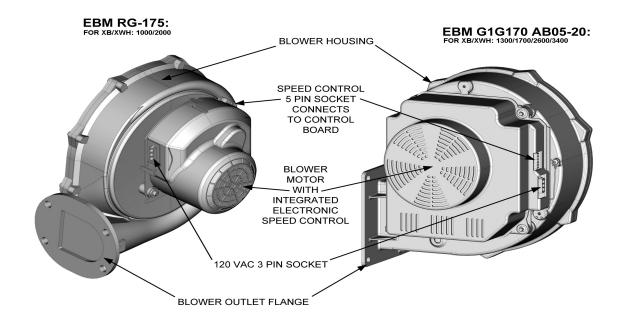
COMBUSTION BLOWER ASSEMBLY
